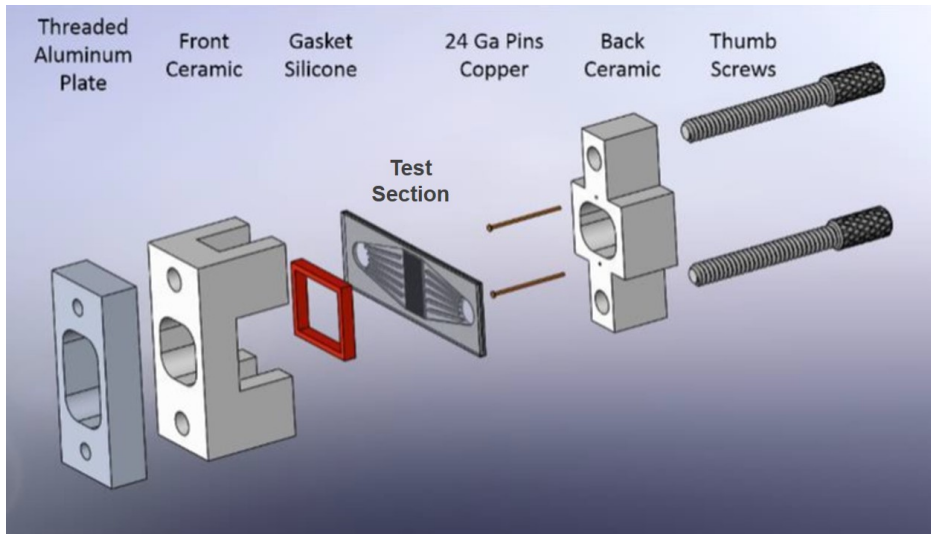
Solid model showing an exploded view of the test section being installed in the ceramic wiring harness.
